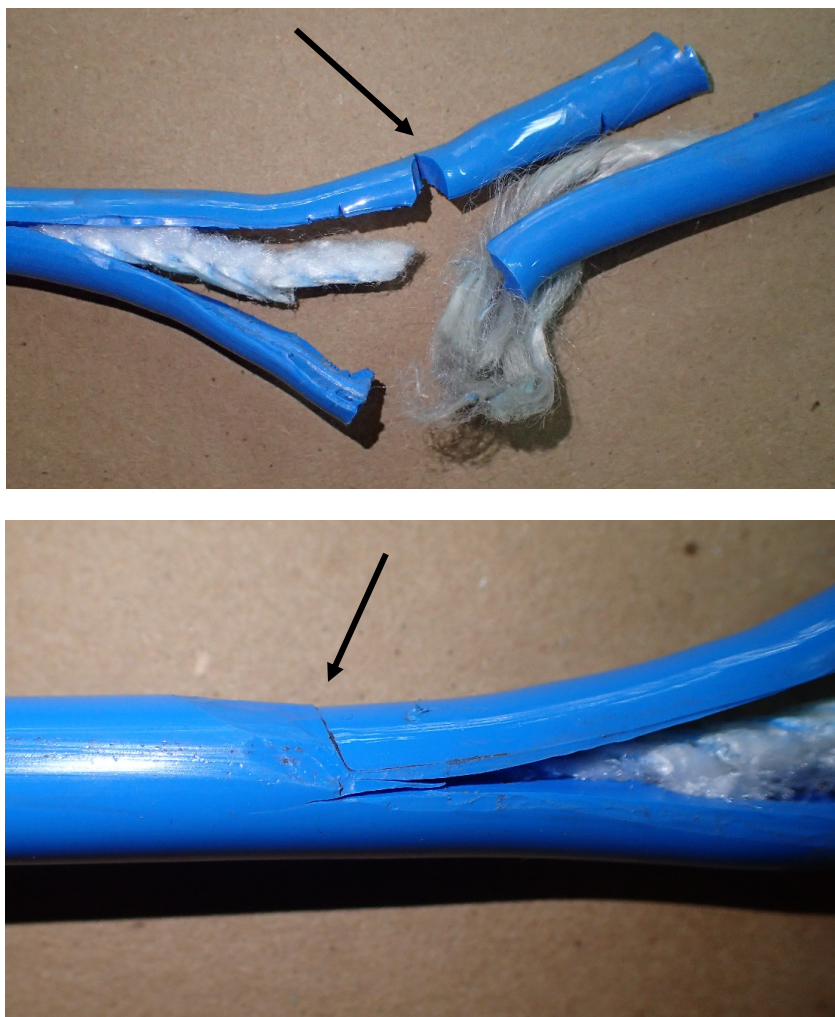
Fractured ends of failed polymer belt from Ibex climb assist system showing excess braided core material (top) and evidence of flash trimming (bottom) indicative of a welded connection.
